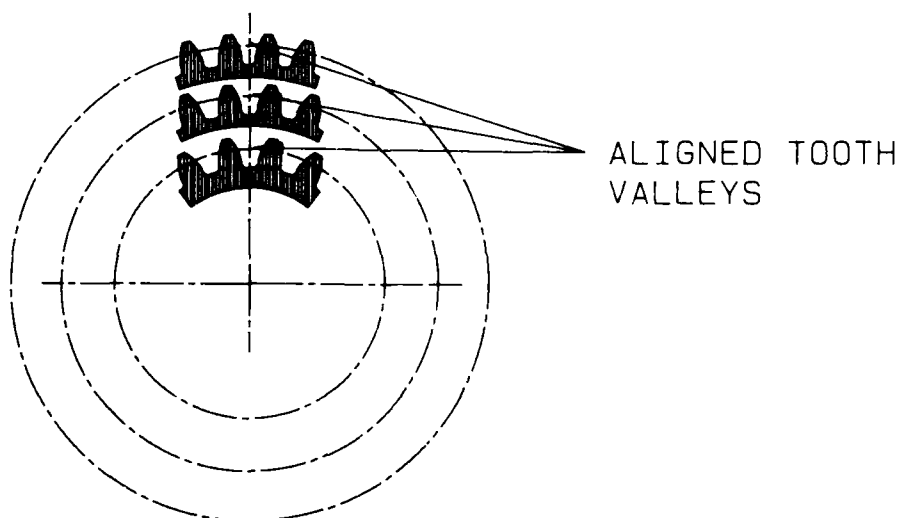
ALIGNMENT OF PLANET GEARS ON SPINDLE GEAR ASSEMBLY
